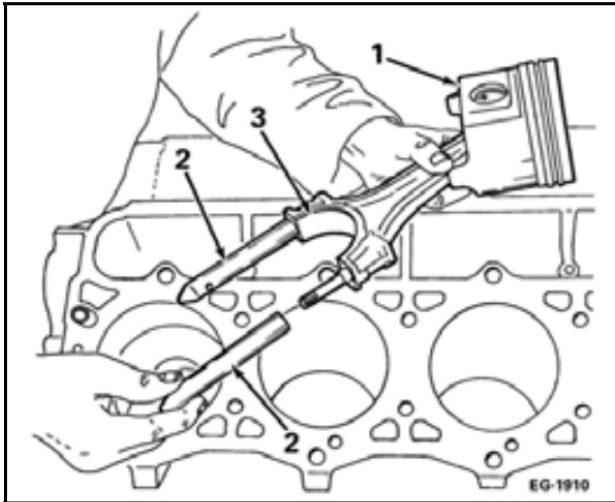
Installing Protector Caps on the Connecting Rod Studs
